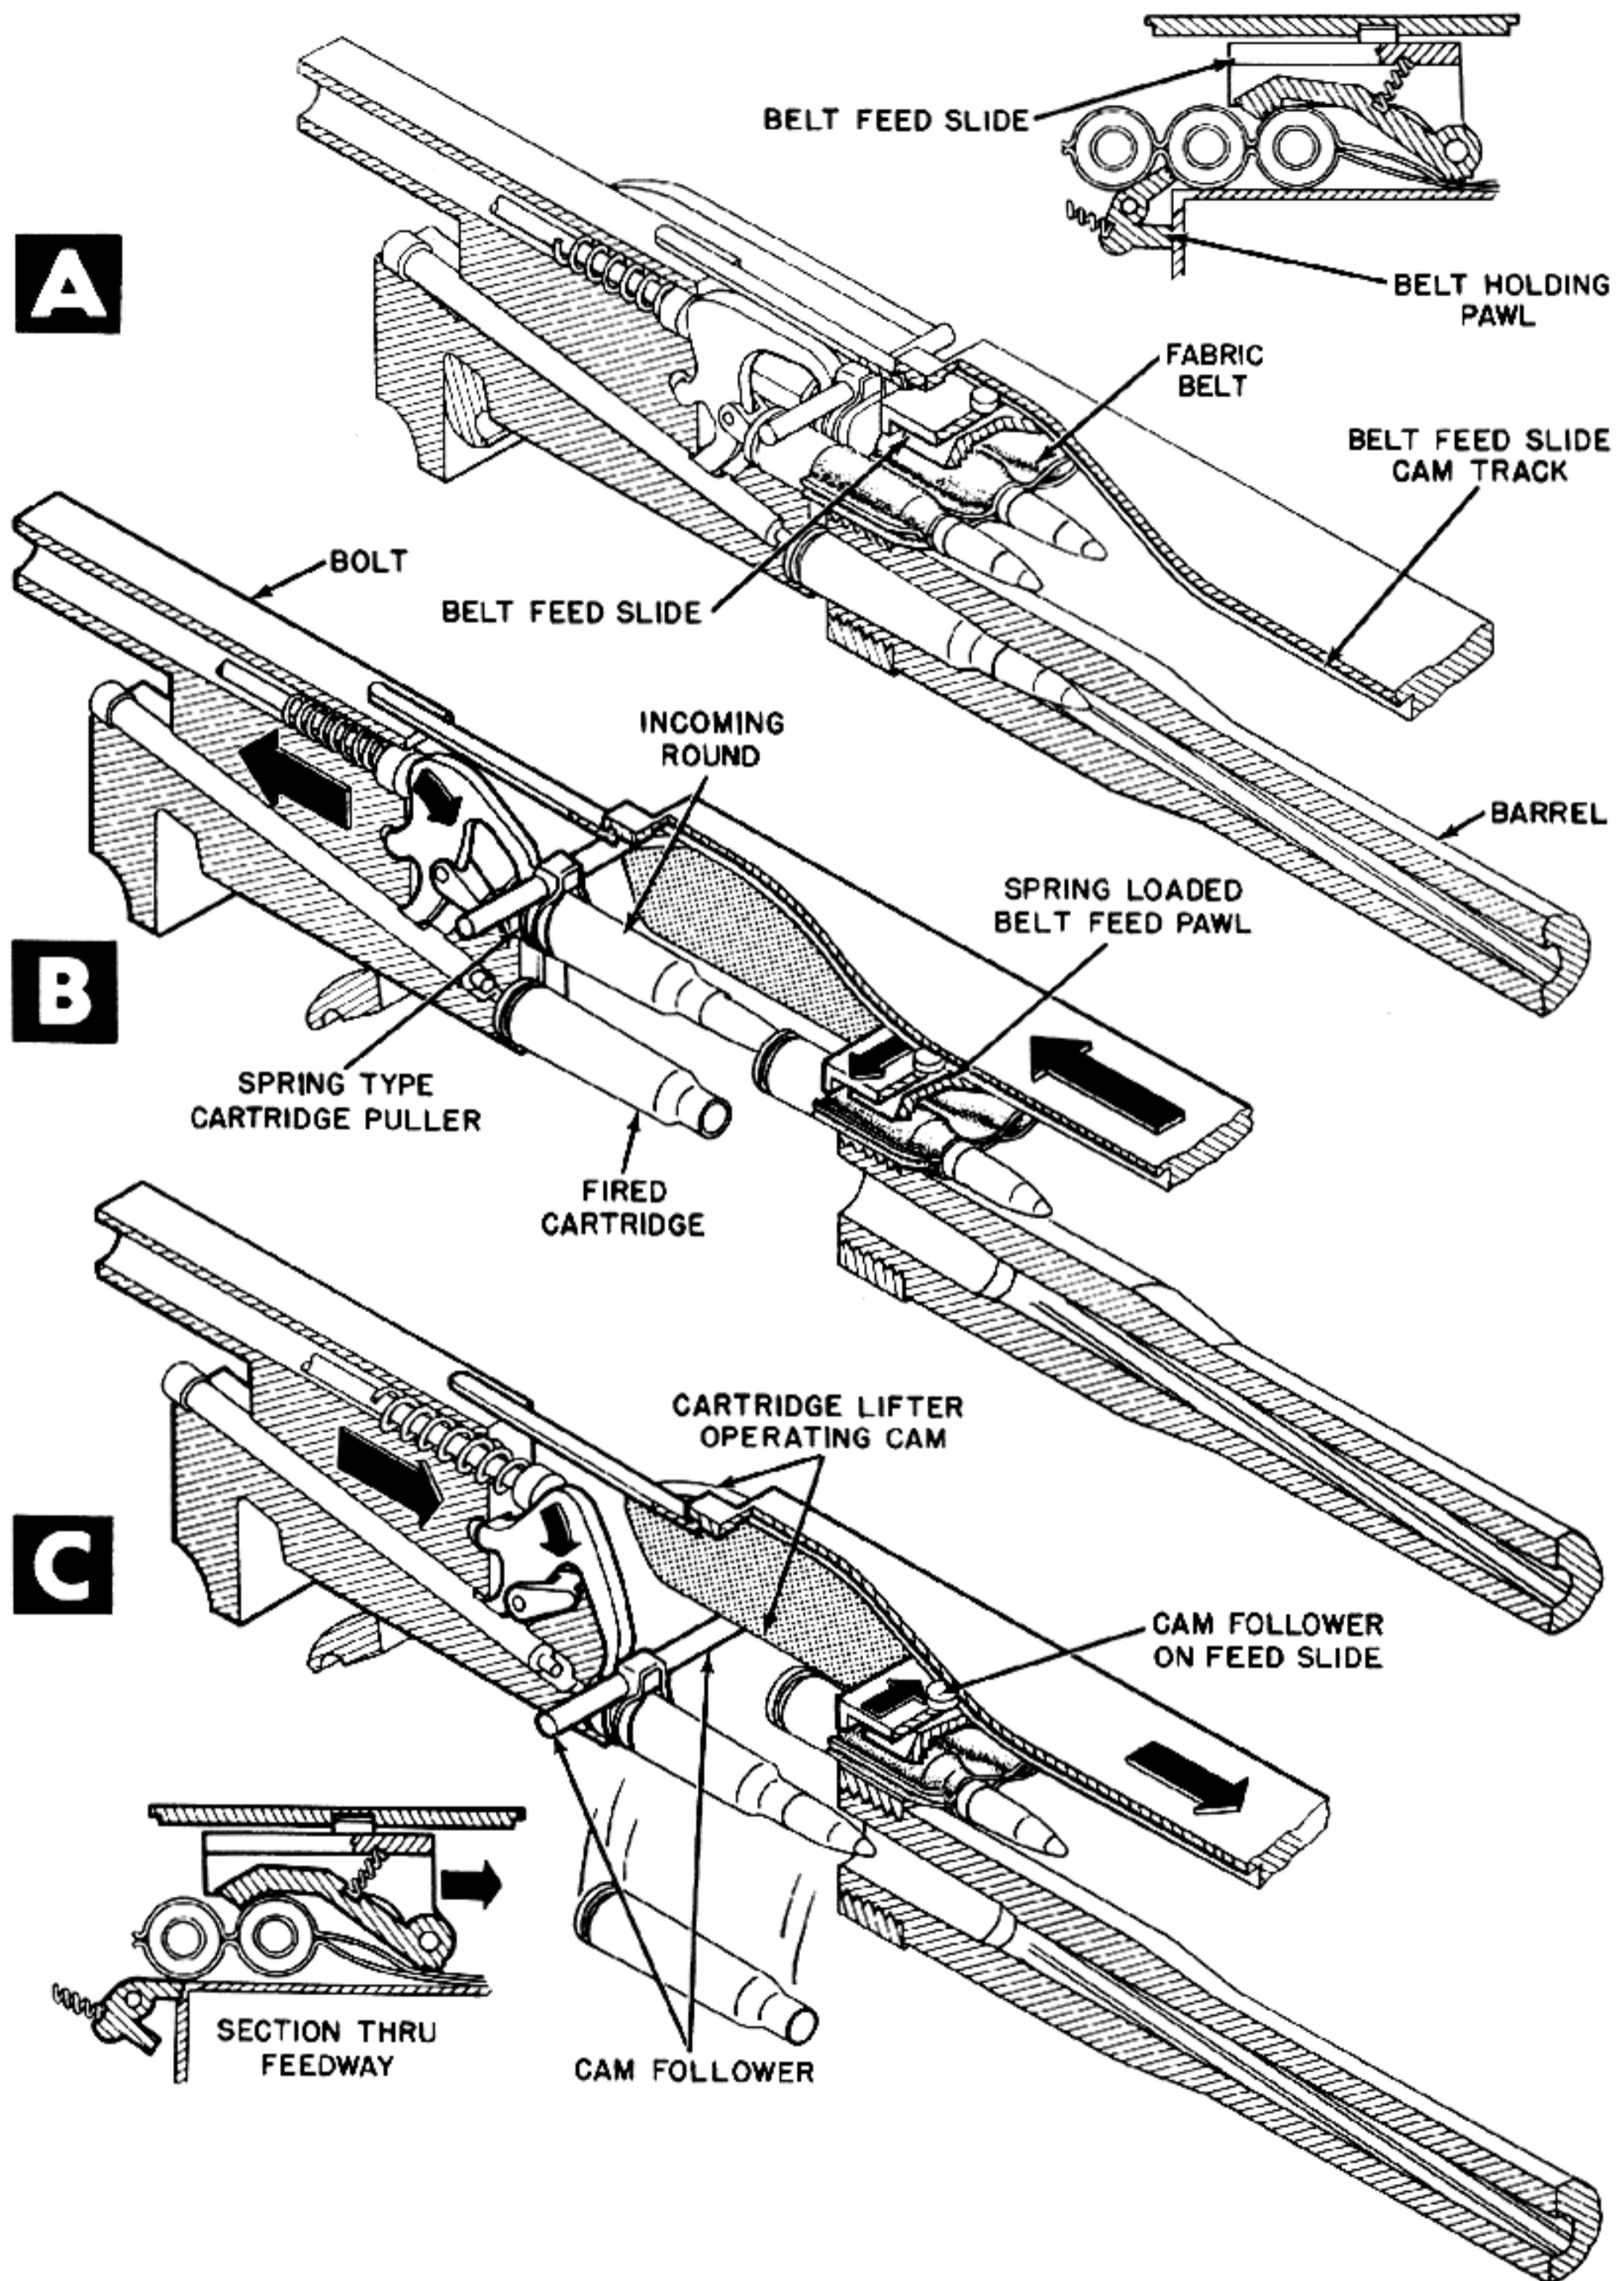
Recoiling Cam Plate Actuates Belt Feed Lever and Cartridge Elevator.
